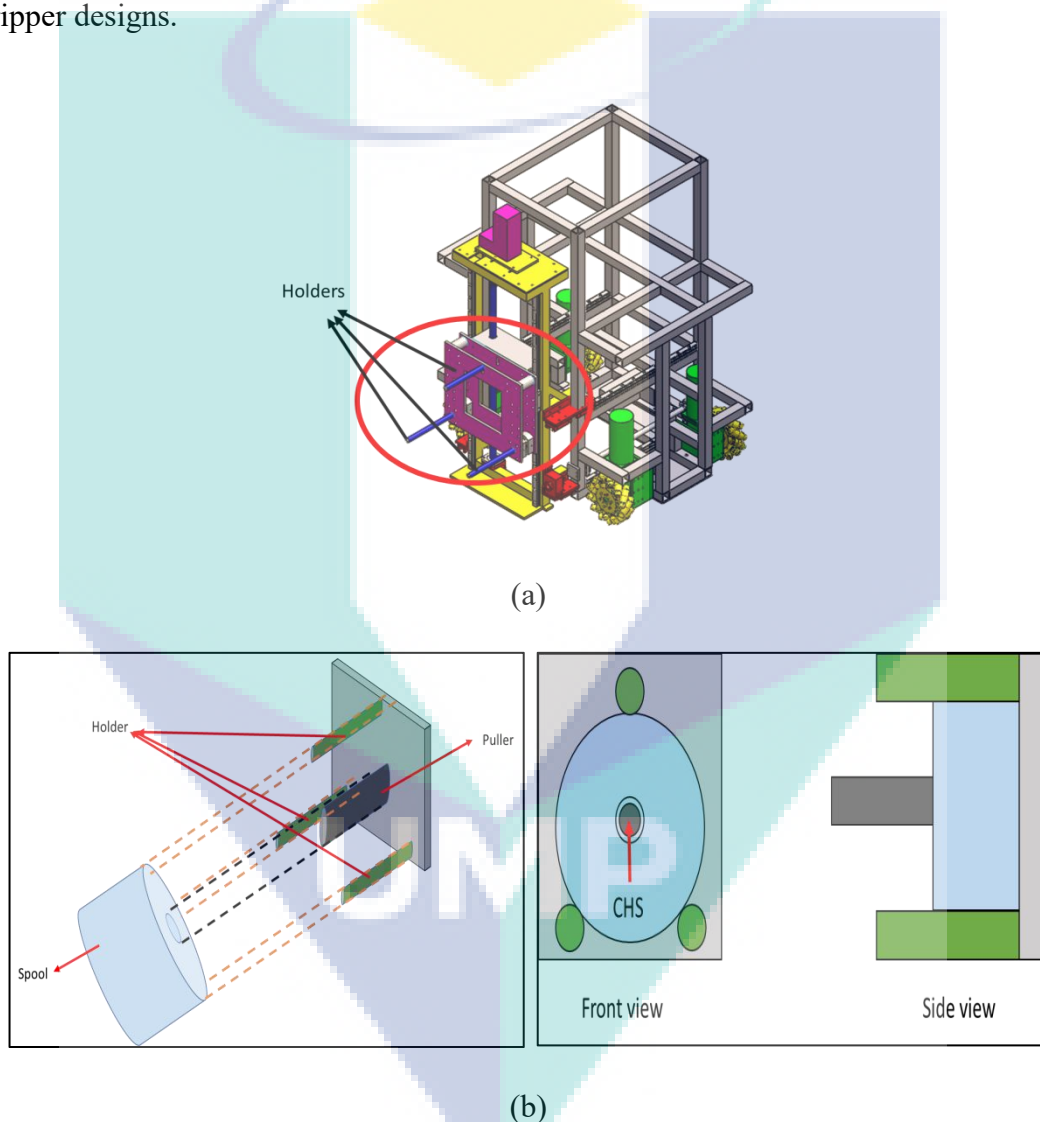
Mechanical design of the robot (a) Full mechanical design of the robot without its camera and puller (b) Illustration design for the puller and holders grasped the spool in front view and side view
